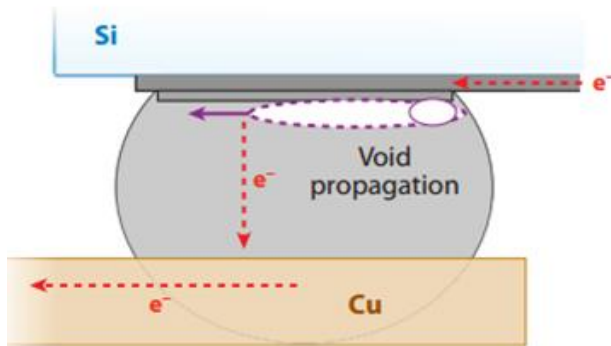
A cross section of a solder joint with a pancake void at the cathode side of solder [5].
